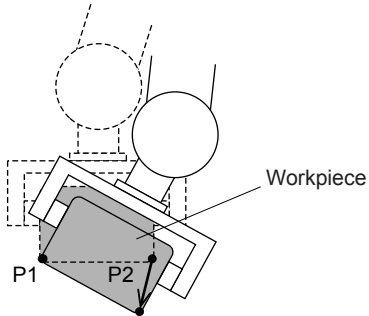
Selection of Tool 2 and axis operations with controlling P2
